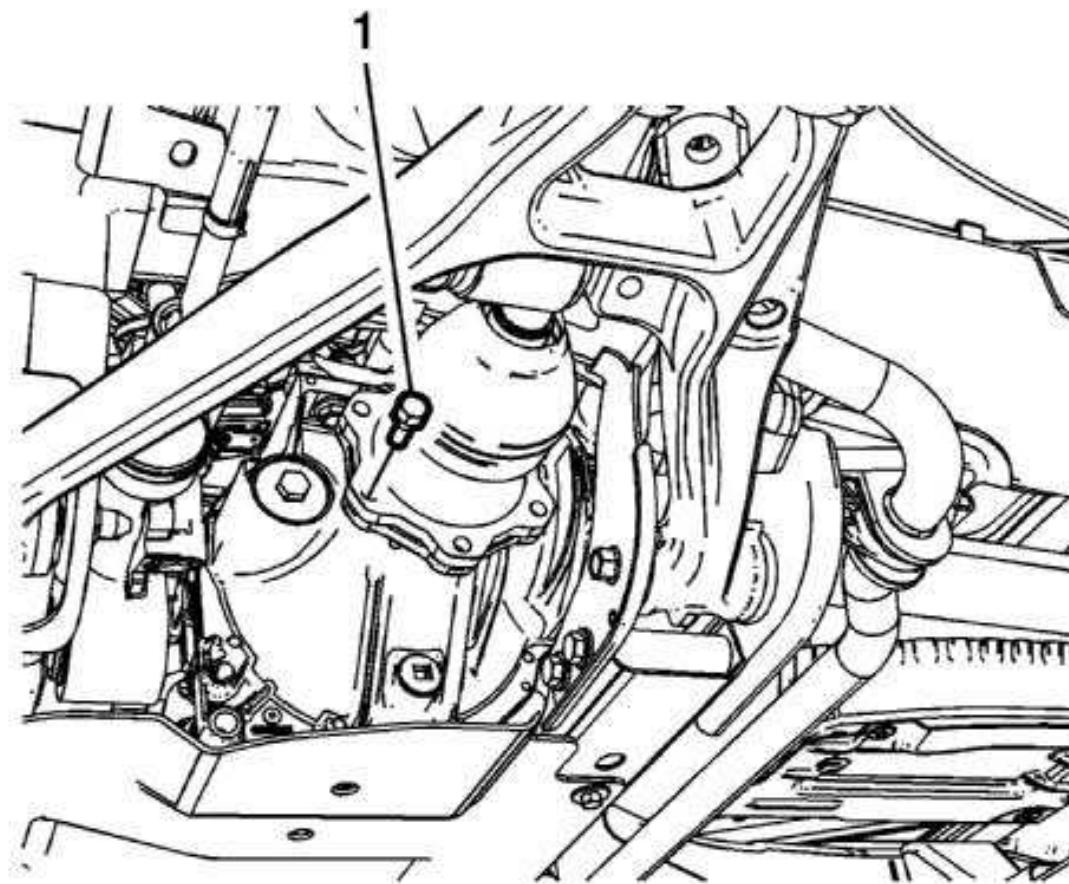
Wheel Driver Shaft Retaining Bolts And Drive Flange
